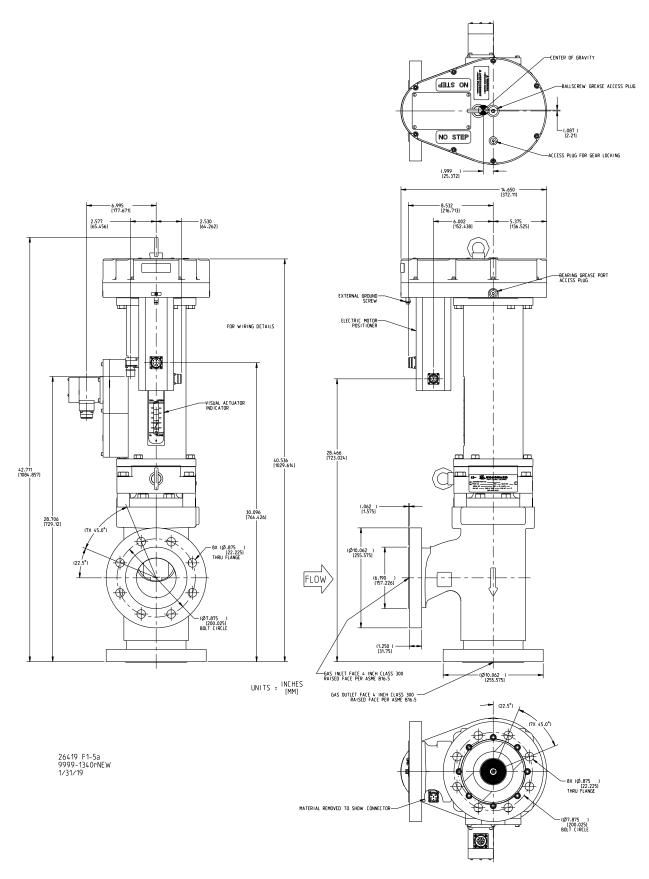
Outline Drawing (4-Inch LESV Class 300)
